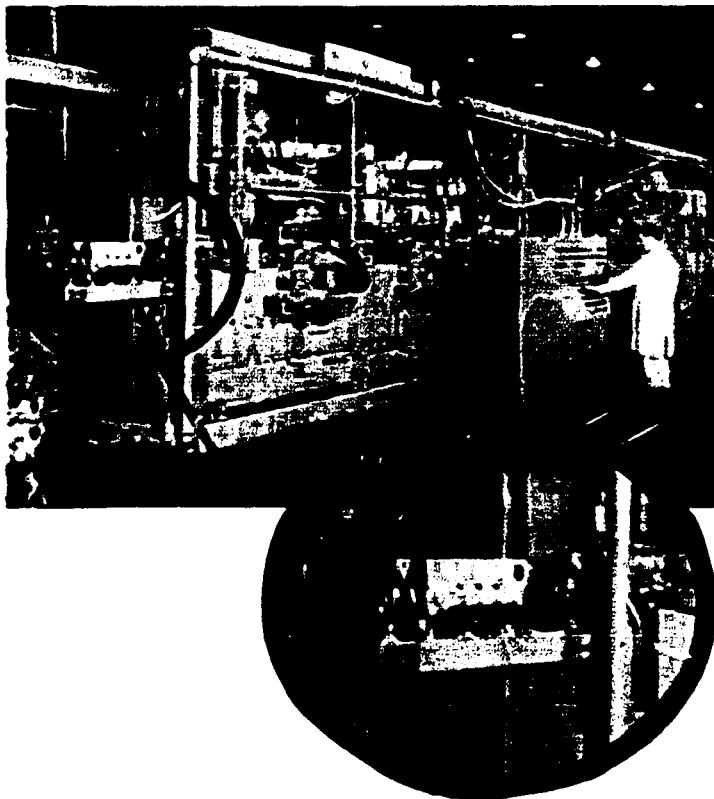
These are cast V-8 car engine blocks. There are 26 separate precision-machining processes that are done to these blocks in this 77' long transfer machine. This machine completes the manufacture of these parts.
